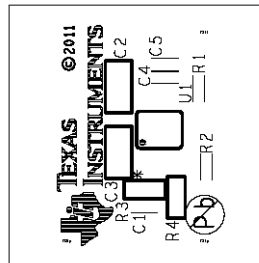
SMP-TPS7A1601-MVK Board Silkscreen – Top Side
